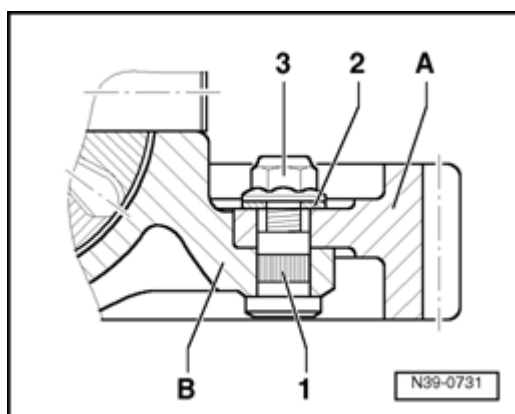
Bolting final drive gear - A- and differential housing -B- together
